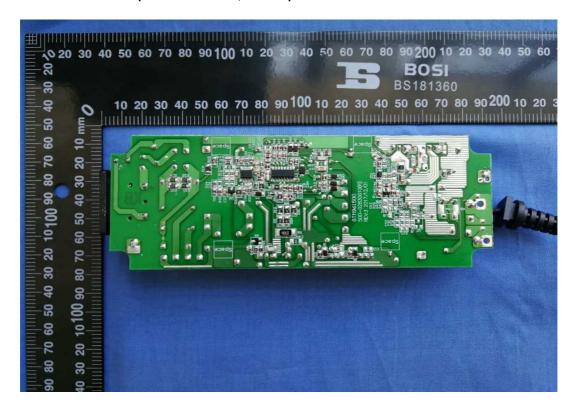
PCB Bottom Side (12.0-36.0V model, Class II)
